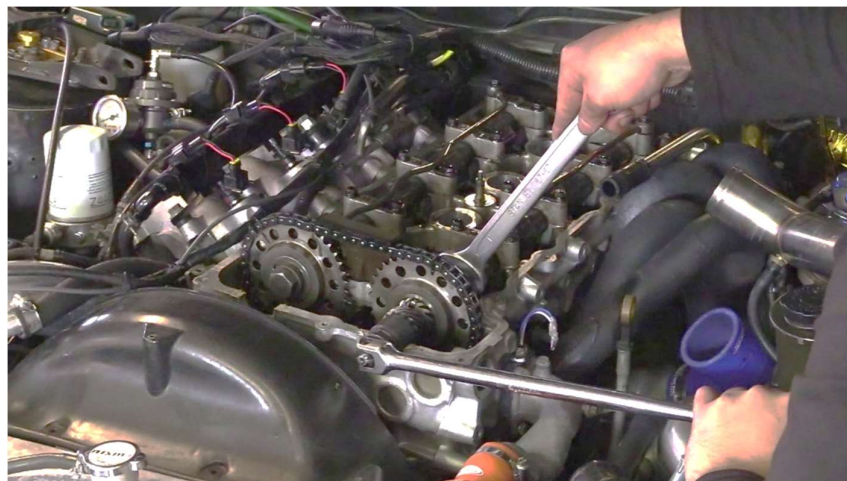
Loosen the Exhaust Cam Sprocket Bolt
